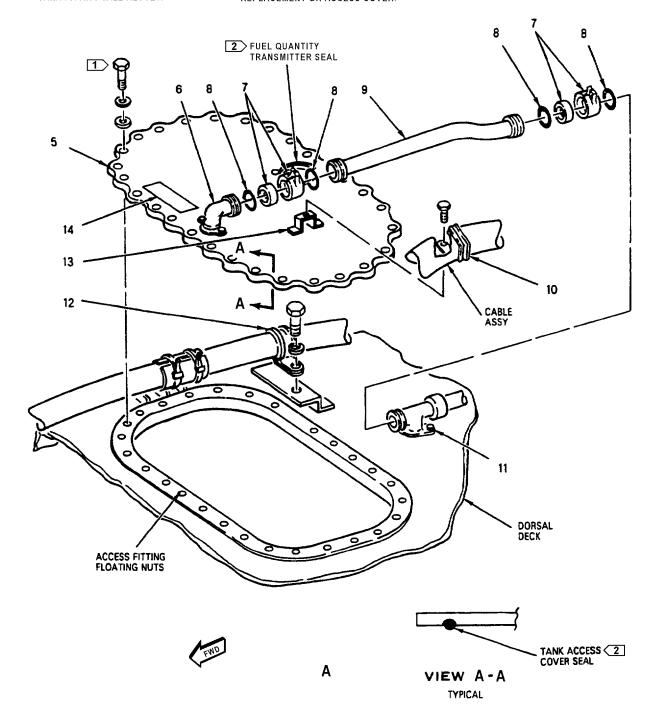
No. 4 Fuel Tank Forward Access Cover (Sheet 2)
